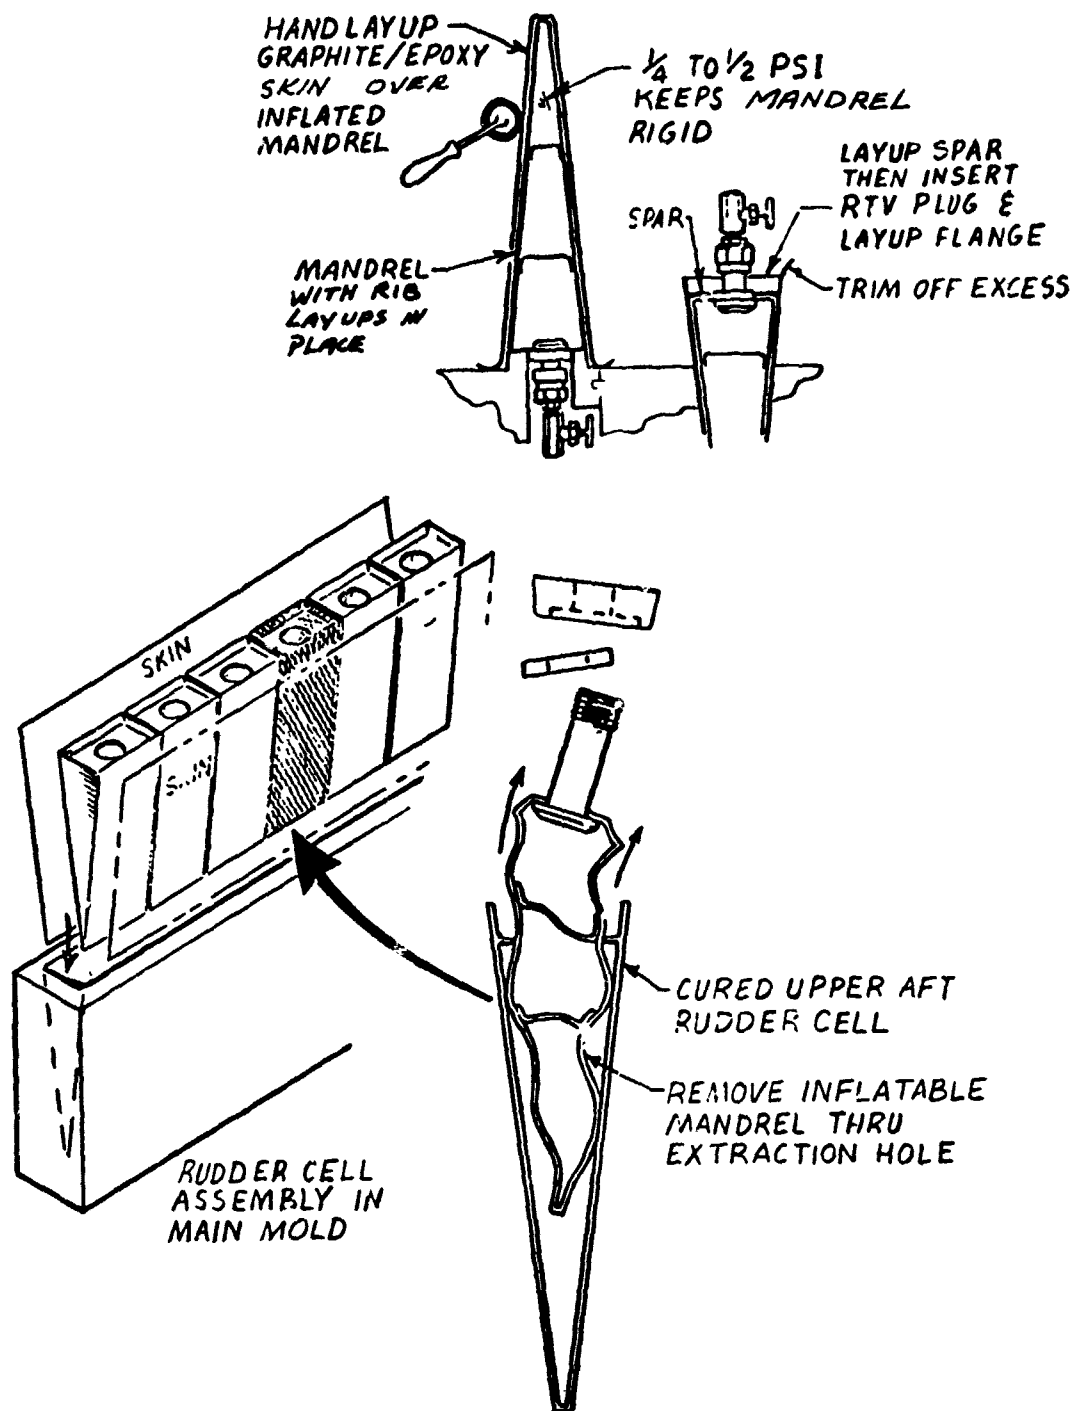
AFT RUDDER FABRICATION AND TOOL REMOVAL
